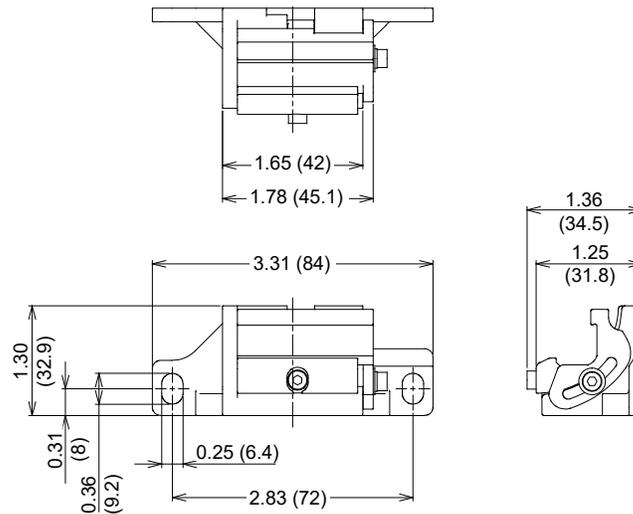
Adjustable Side Bracket Dimensions [in. (mm)]
